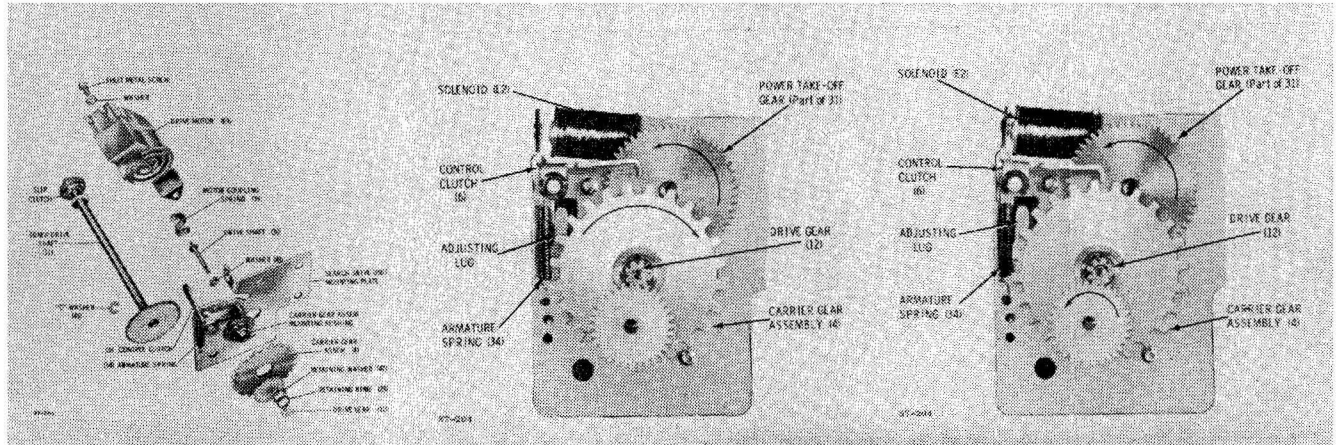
Mechanical tuner details... (a) parts identification, (b) search drive unit with the clutch *DISENGAGED*, and (c) with the clutch *ENGAGED*.
